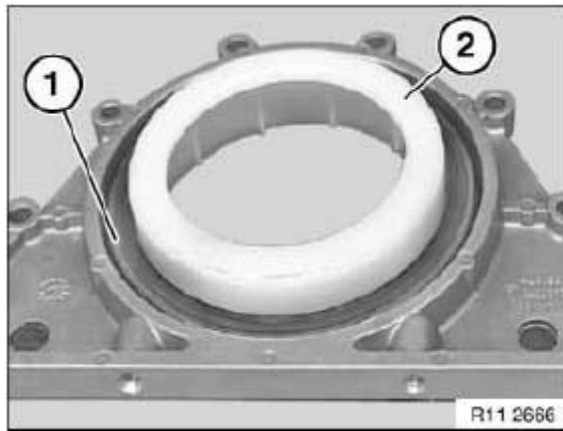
Identifying Support Sleeve And Crankshaft Radial Seal
